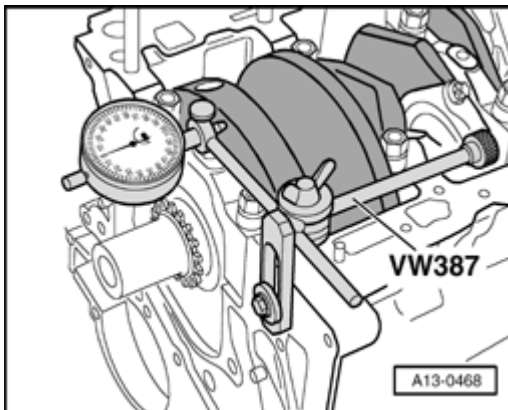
Attaching Dial Indicator Together With VW387 Dial Gauge Holder To Cylinder Block And Set Indicator Against Crankshaft Counterweight
